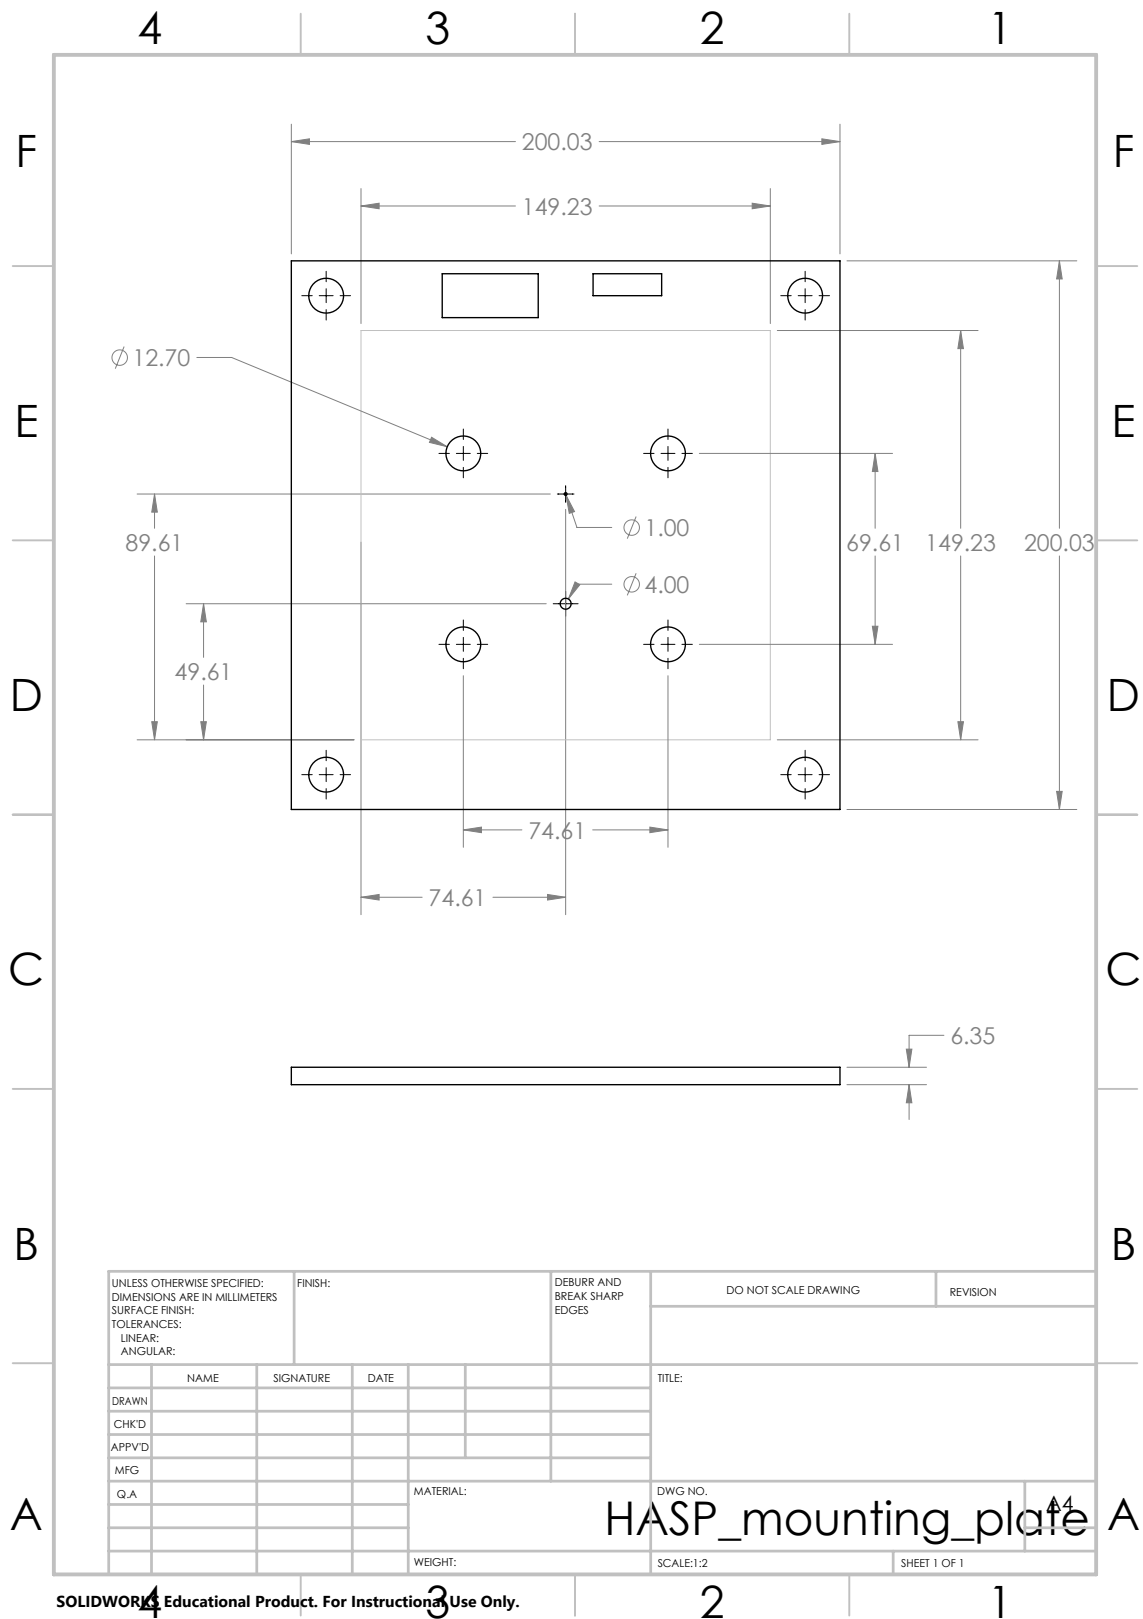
HASP mounting plate; note that of the footprint of the main HAAT payload does not enter the 'Keep Out Area'. Dimensions in *mm*.
